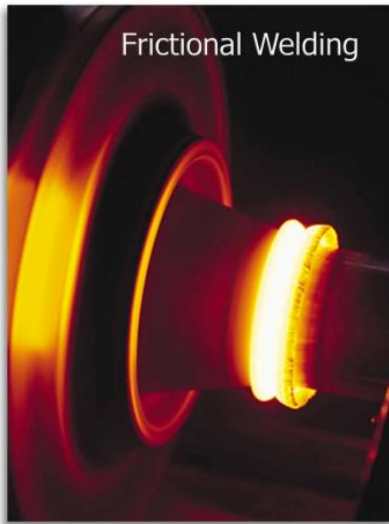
Modern 'frictional welding' welds dissimilar metals with frictional heating in a fraction of a second. Courtesy of American Frictional Welding, Inc.
